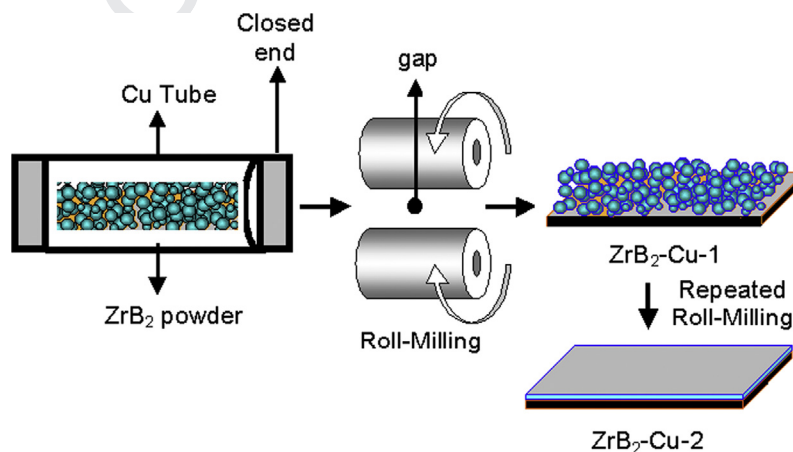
ZrB₂ coating on Cu metal using the roll-milling process [37].
